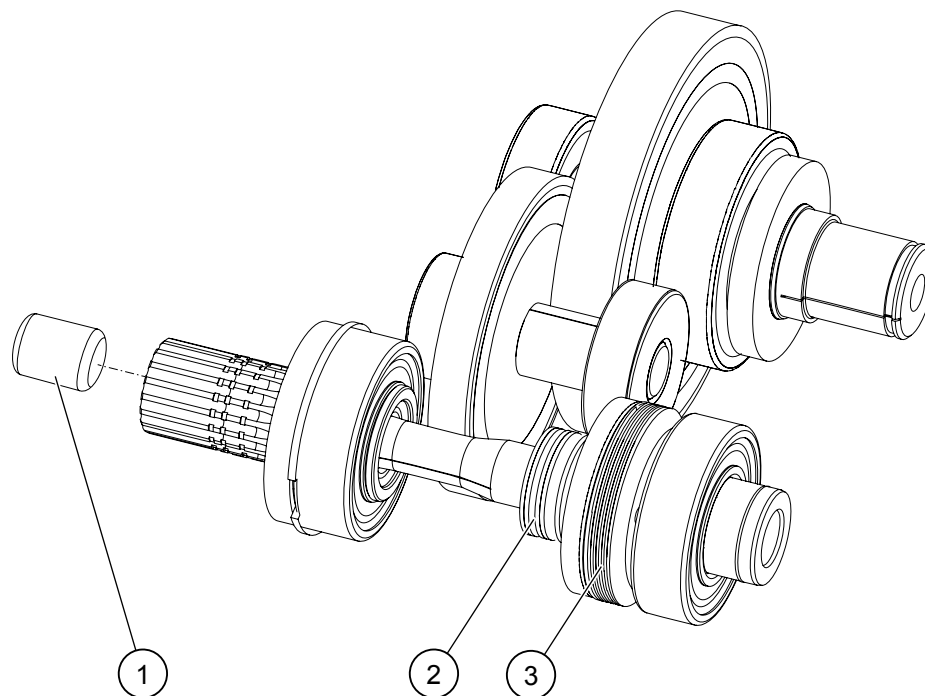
Slipping clutch construction with one torque limiter disc, SL05
